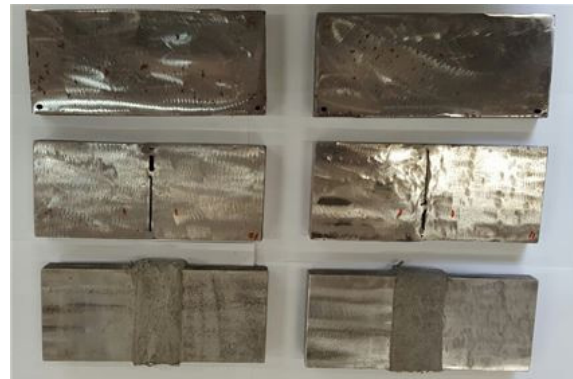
Photo of normal, welding, welding & coating steel plates
